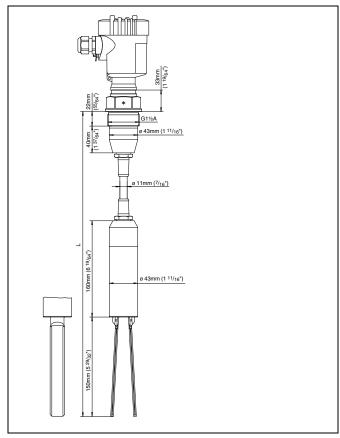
VEGAWAVE 62 - threaded version G11/2
